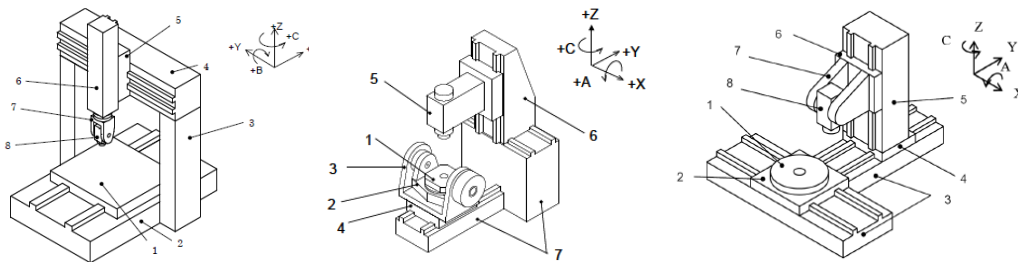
ISO 10791-7 considered 5-axis machine tool configurations
